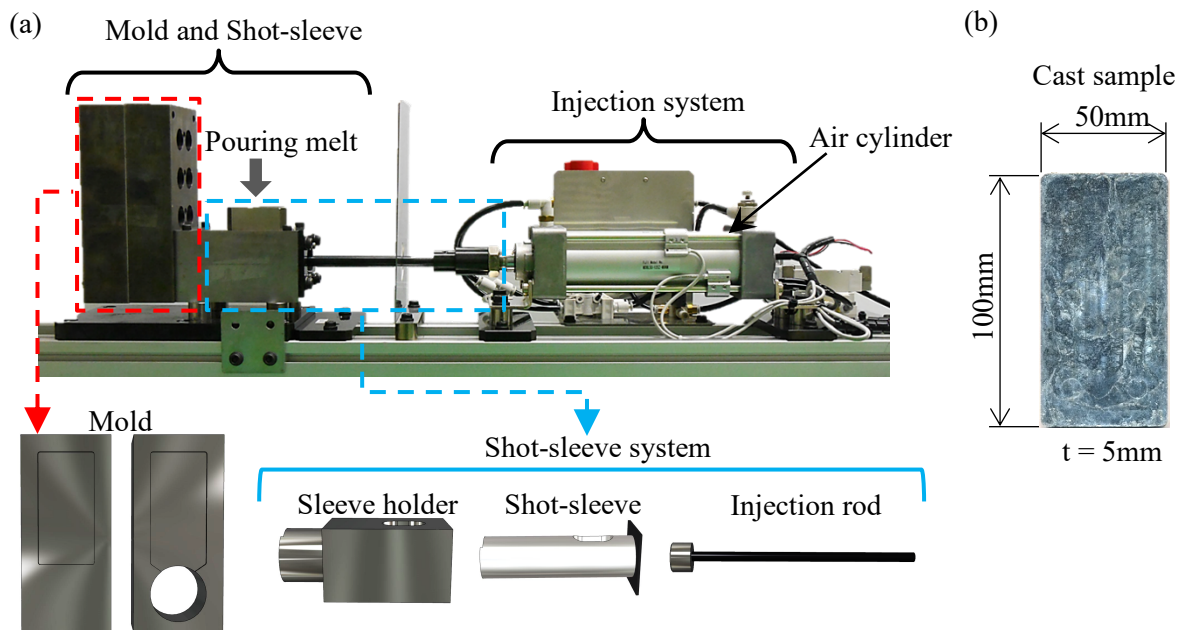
(a) Photograph of the casting machine, consisting of mold, shot-sleeve and injection system; (b) photograph of the Sn cast sample.
